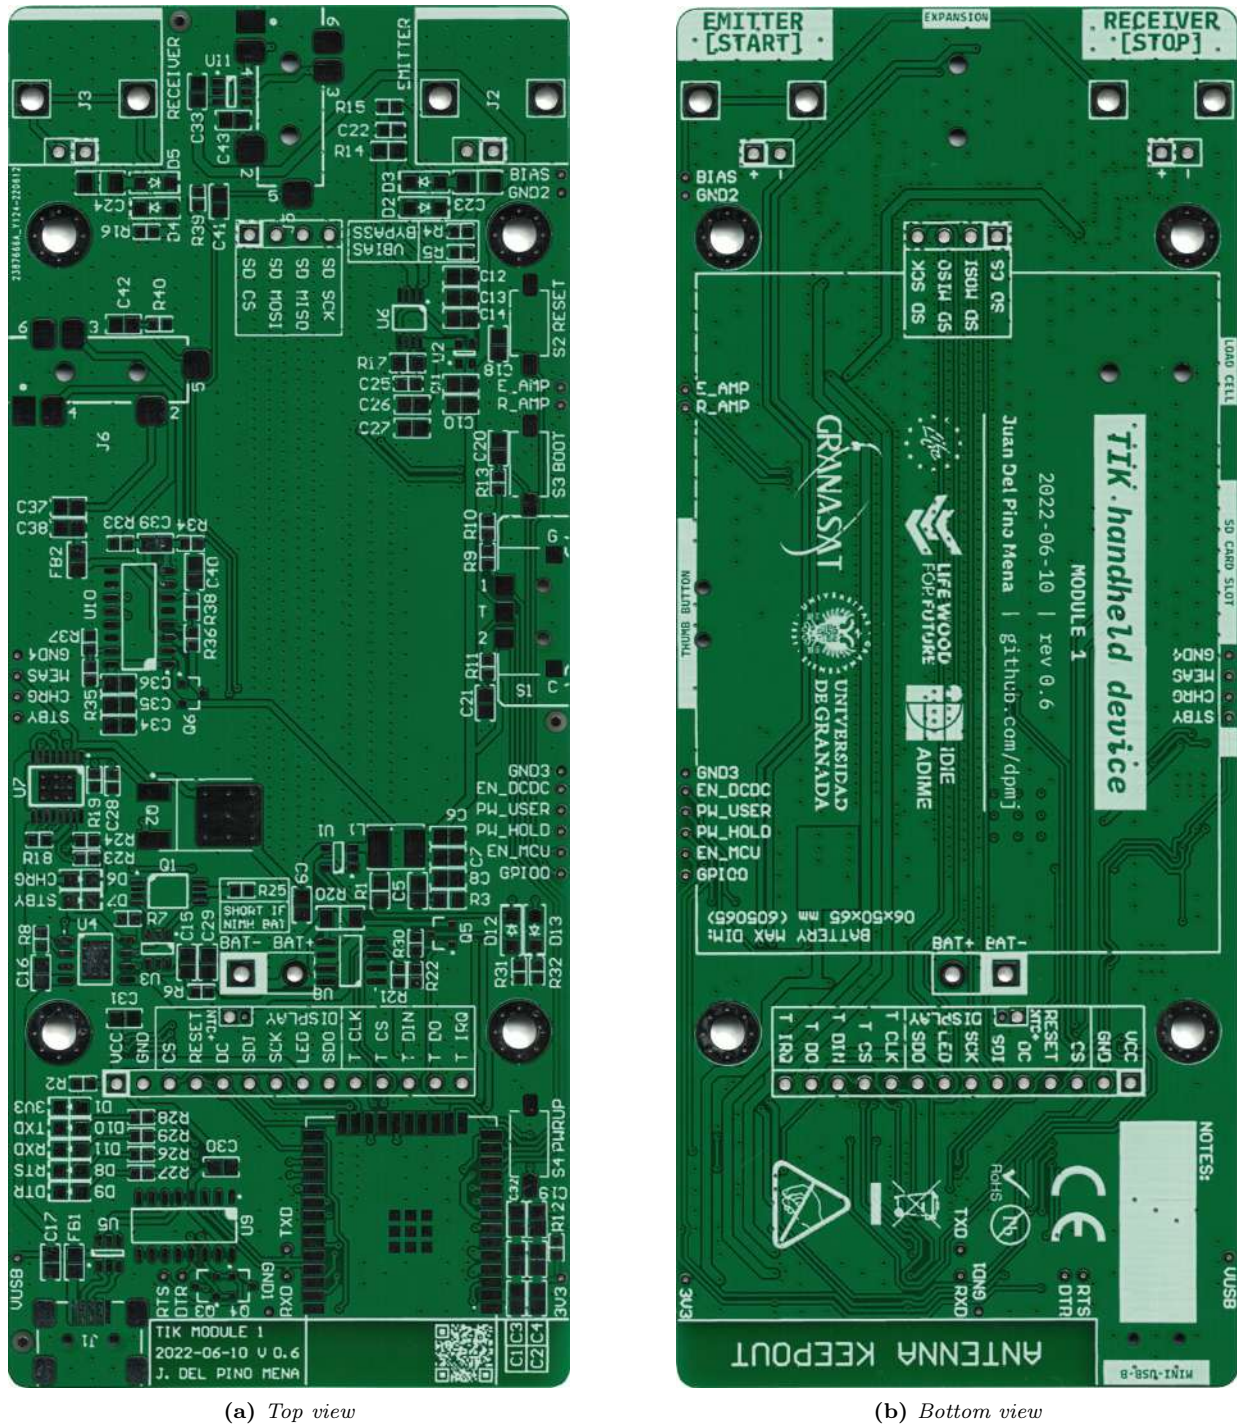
Top and bottom view scans of the manufactured PCB.
